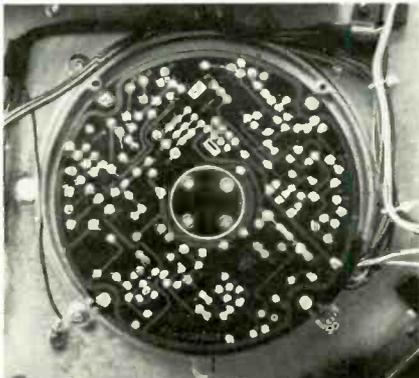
Bottom of circuit board used for sequencing the stator electromagnets.
